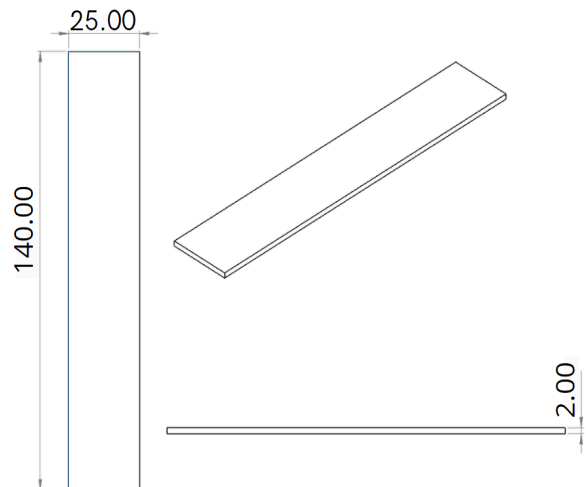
Test specimens dimensions for Flexural (3 Point-Bending) testing
